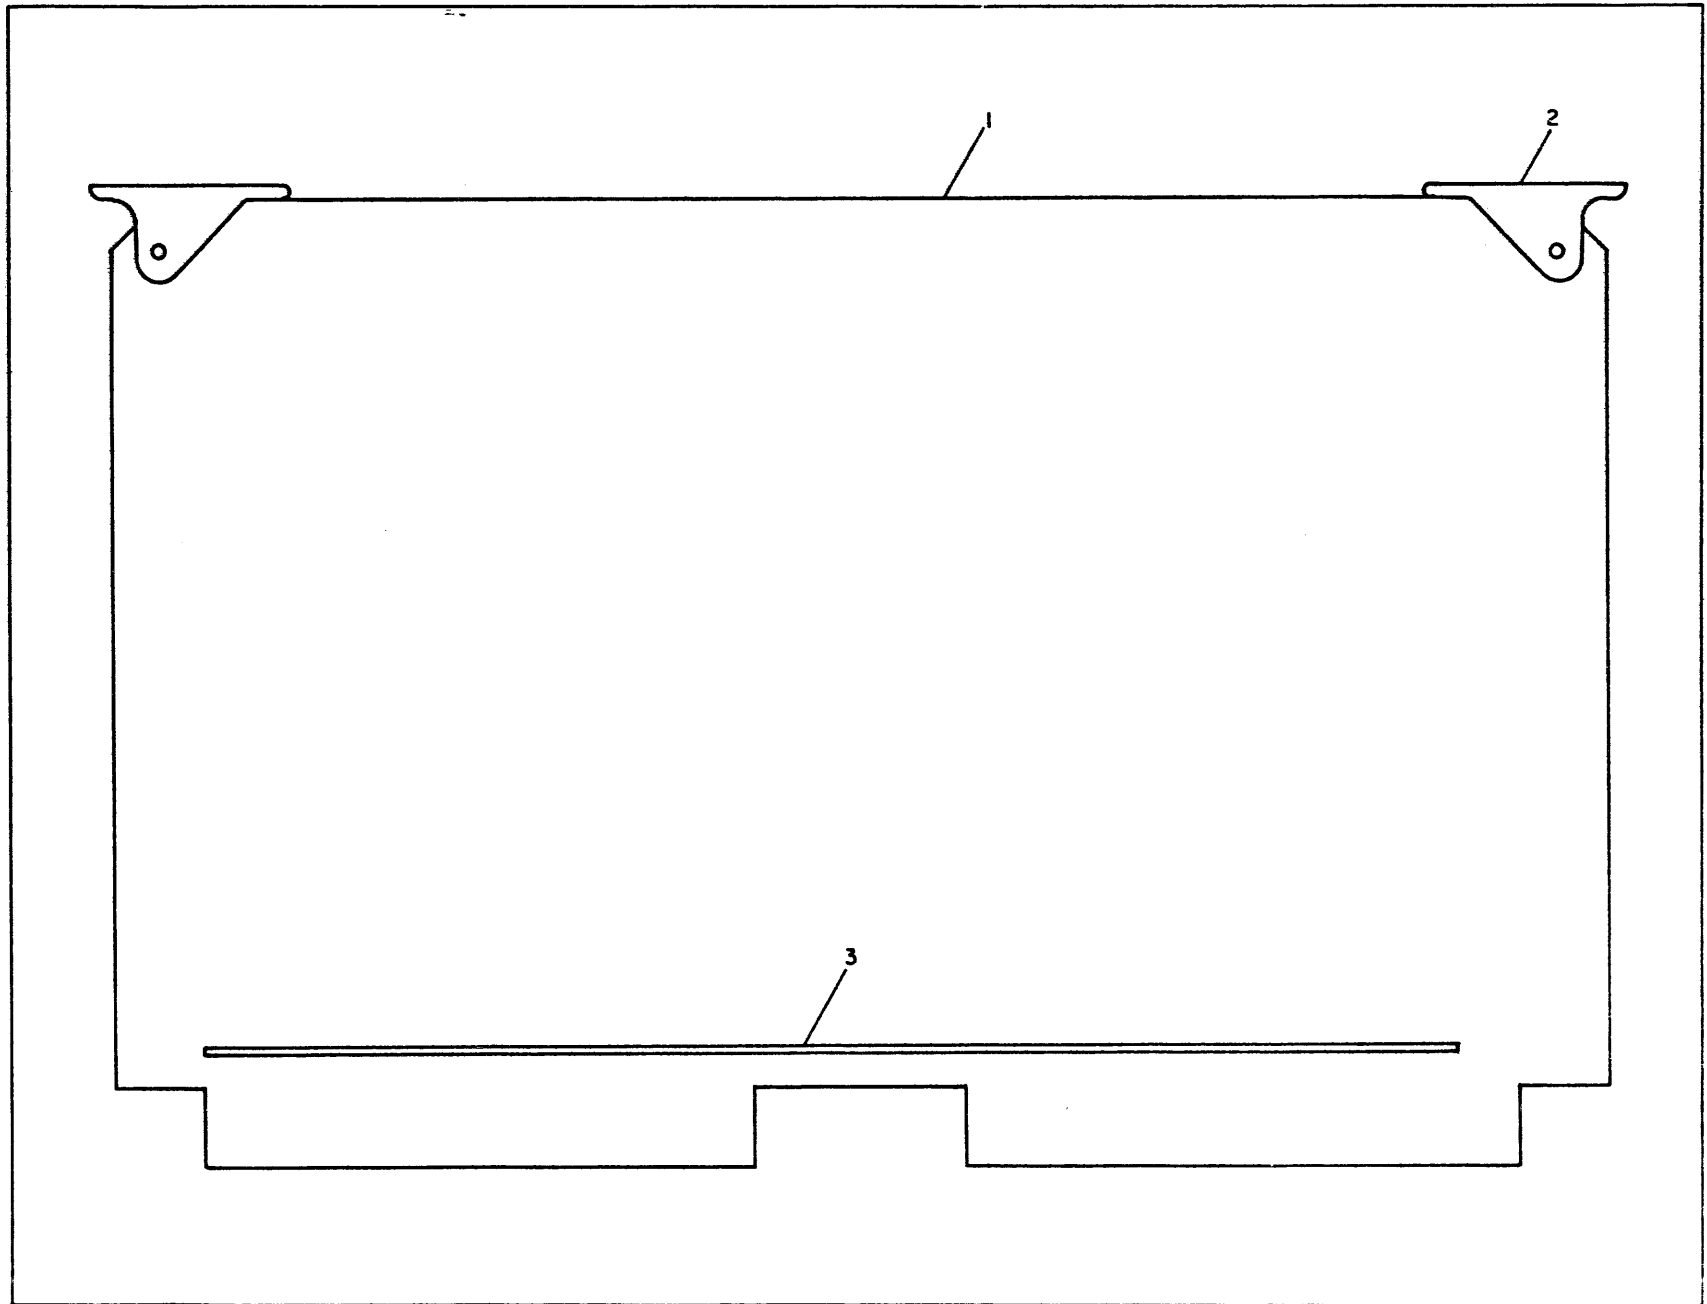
P. C. ASSEMBLY, DRIVER CARD (Model 2892A)
